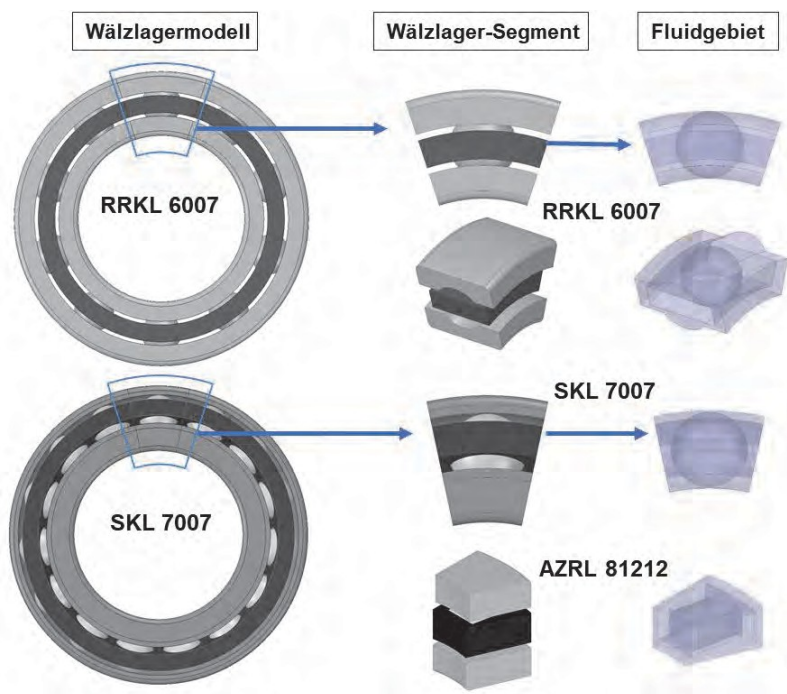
Rolling bearings of different designs, left: full model, center: angle segment, right: fluid area of the test bearings (see Table 1)
